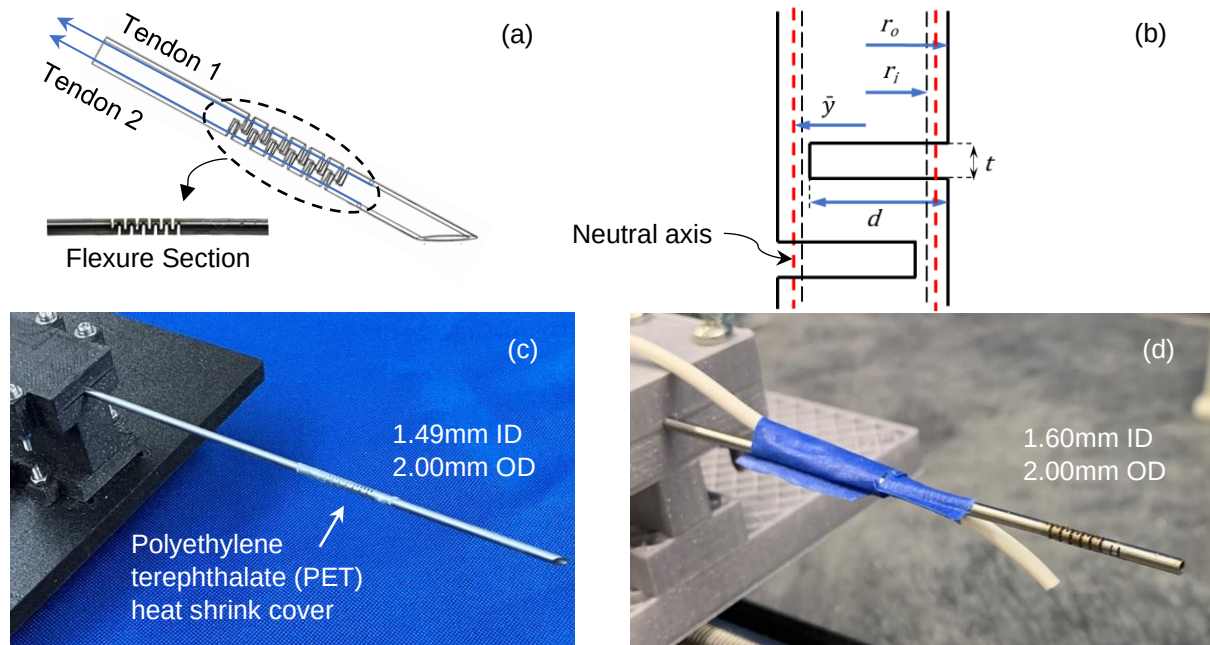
Schematic design of (a) tendon-driven active needle with (b) the notch dimensions fabricated on a nitinol tube using (c) UV laser cutter (US Tool), and (d) typical machining in our lab (EM Tool).
